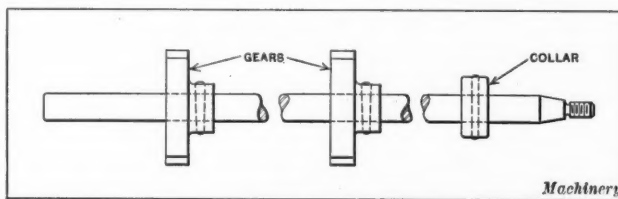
Shaft with Gears and Collar assembled on it by the Use of the Jig shown in Fig. 2
